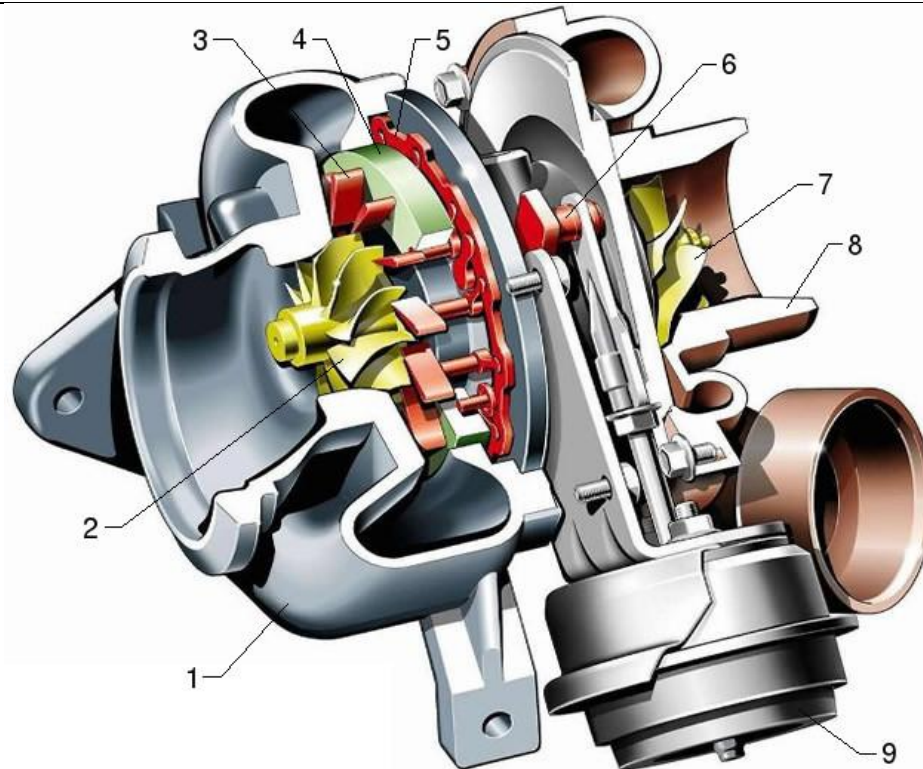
Variable geometry turbocharger – components (1 .turbine casing, 2.turbine wheel, 3.vanes, 4.unison ring, 5.adjustable ring, 6.lever system, 7.compressor wheel, 8.compressor casing, 9.pneumatic actuator)
